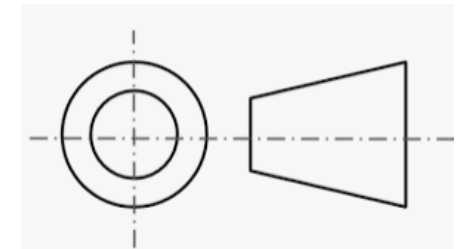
Drawing standard BS8888—all orthographic drawings must be drawn and dimensions to BS8888 standards
